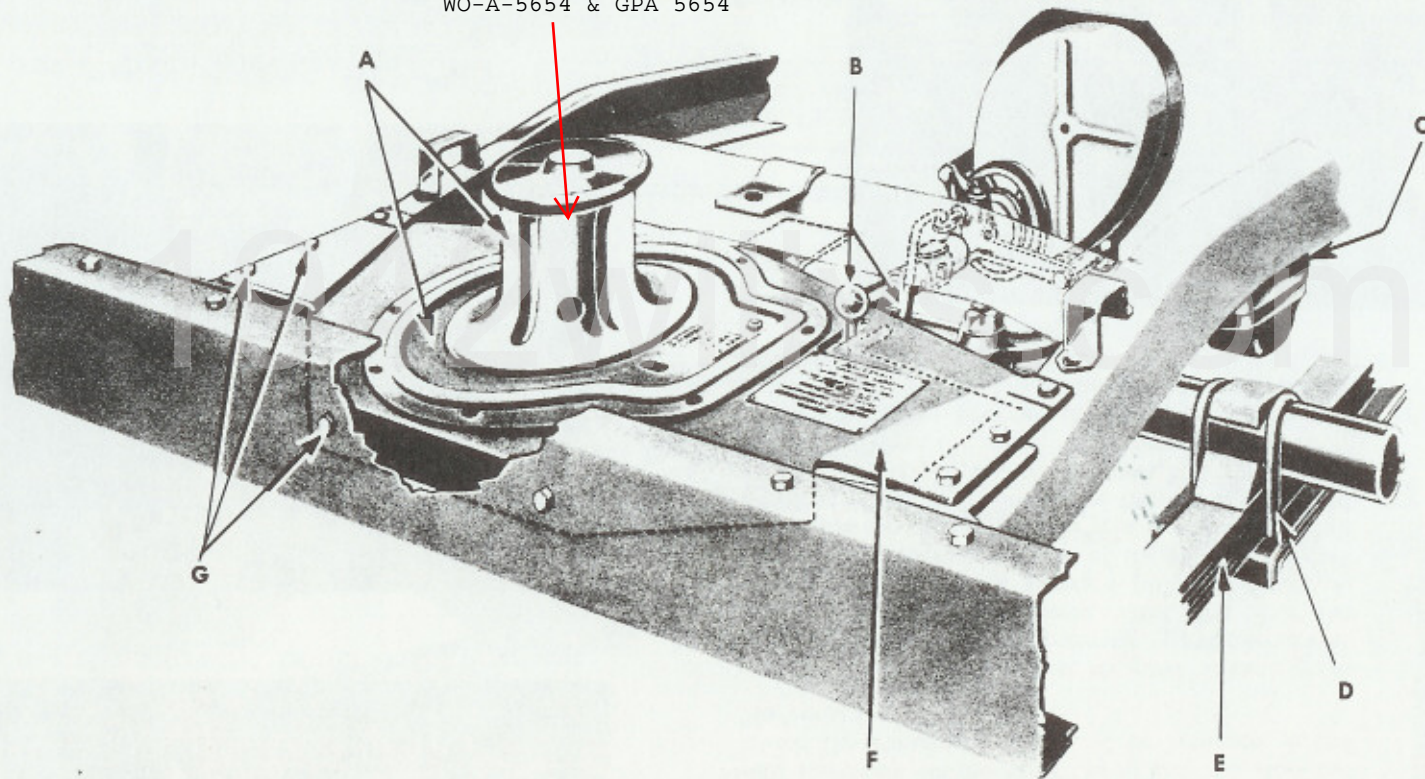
CAPSTAN WINCH—INSTALLED VIEW
